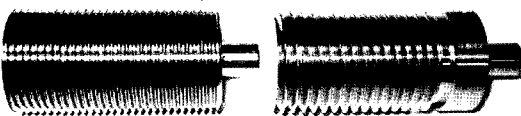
Measurement screws(M30, P2.0, P3.0)
